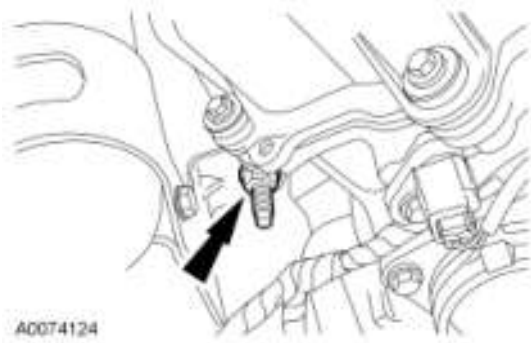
Installing A/C Manifold And Tube Assembly Support Bracket Nut
